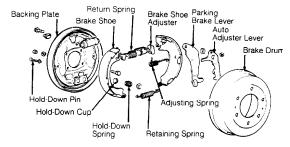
Exploded View of Rear Brake Assembly Courtesy of Mitsubishi Motor Sales of America.
